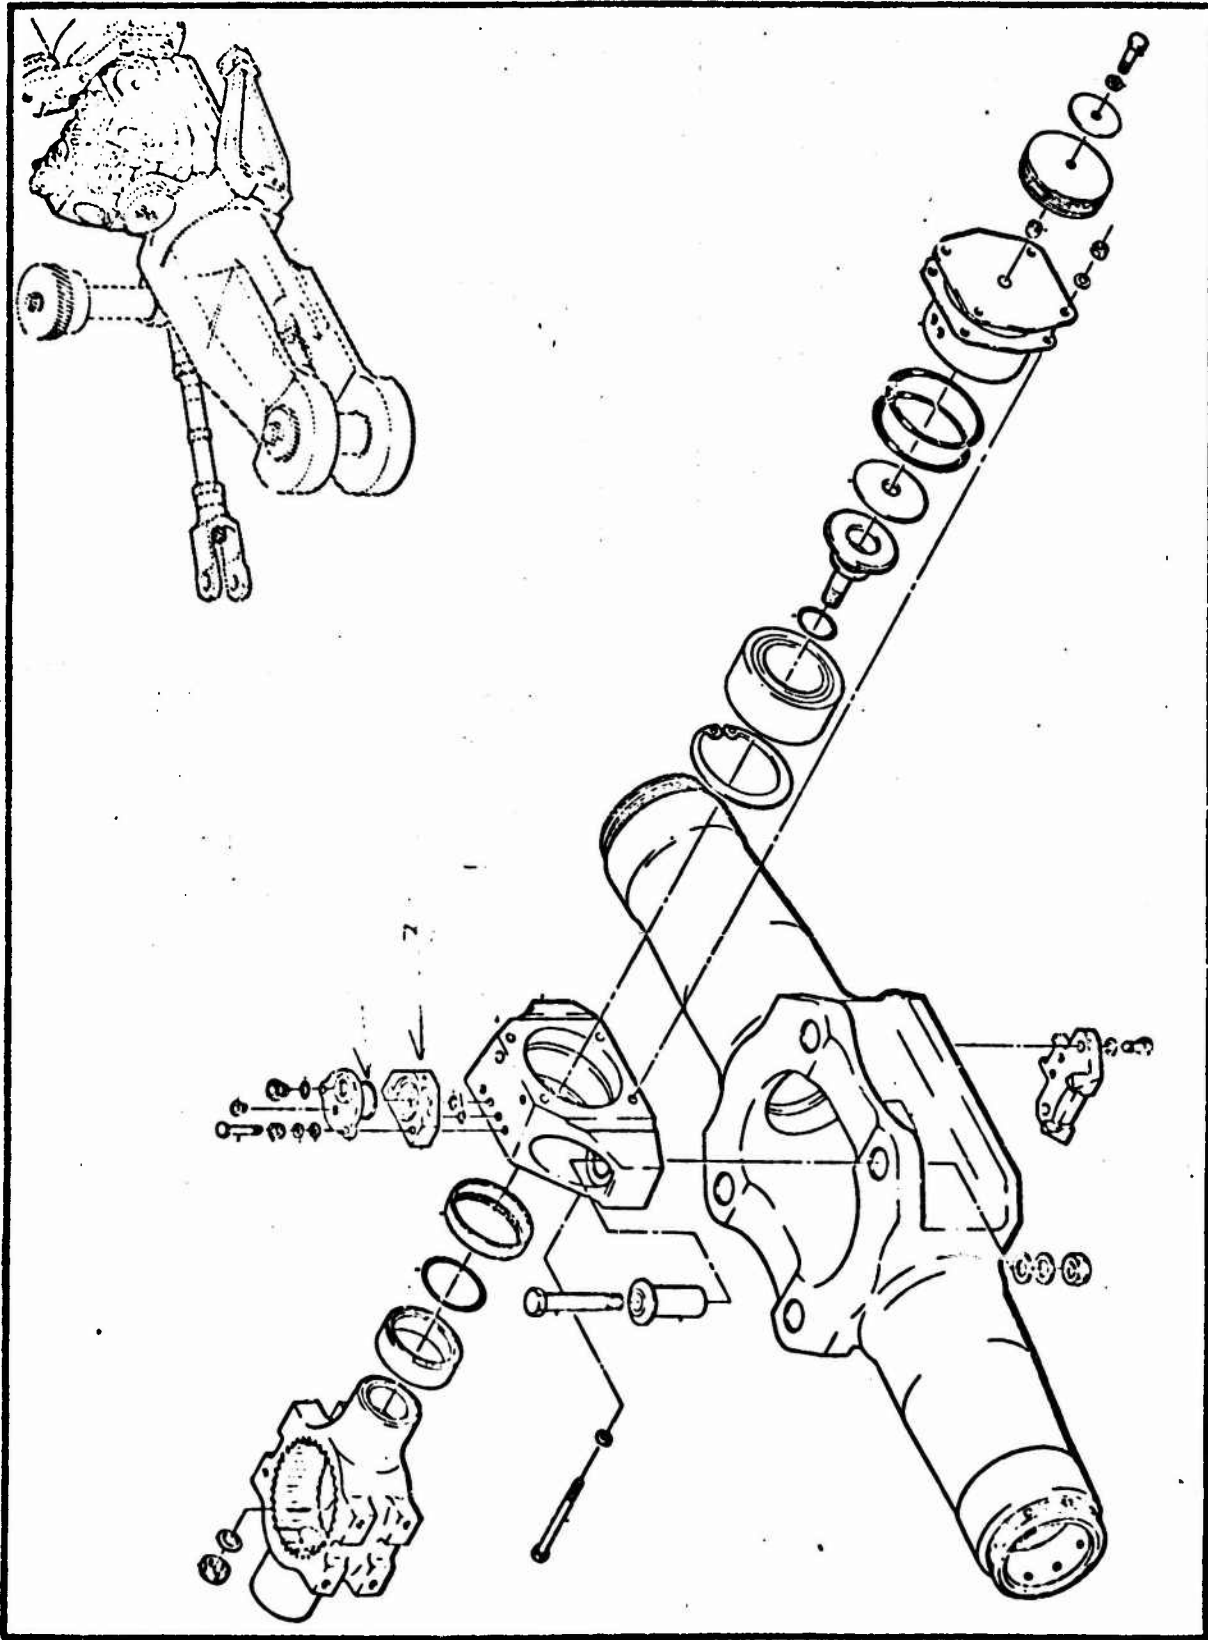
Hub Assembly, Main Rotor, Inboard Section
